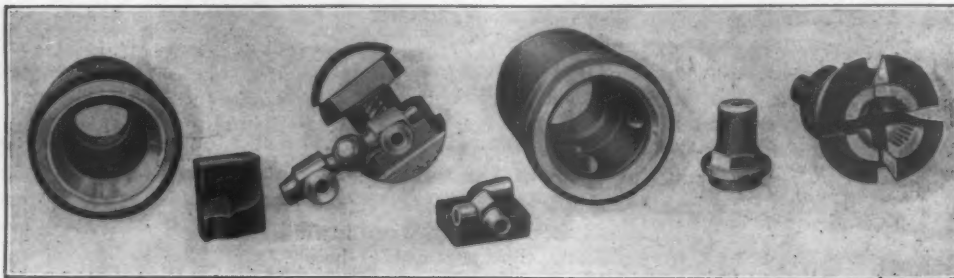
Details of the Alligator and Four-Hinge Chucks.
